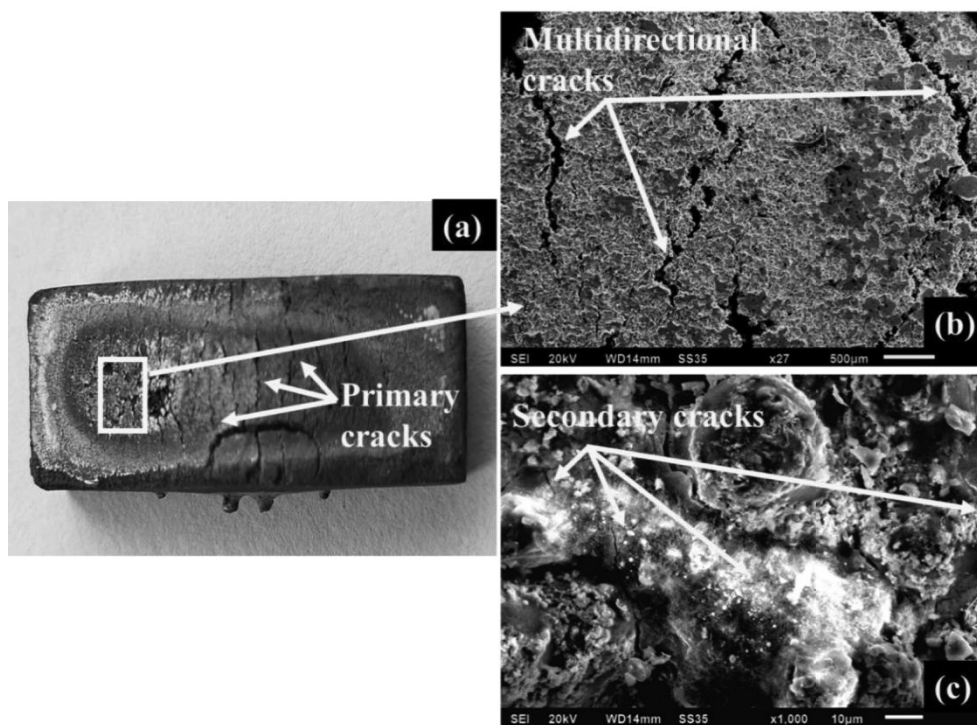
Fractured EWAC-5Al₂O₃ clad specimen after 3-point bend test (a) Photograph of the top surface; SEM micrograph showing (b) primary cracks (c) secondary cracks
